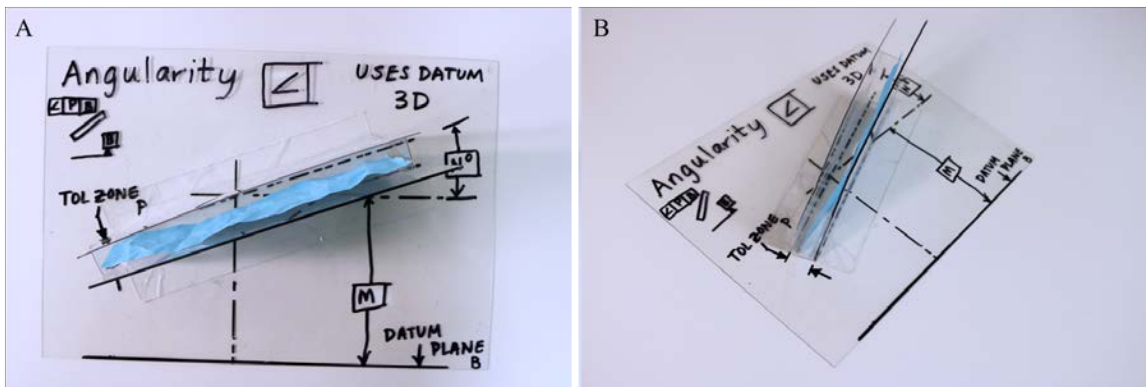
GD&T Spatial Learning Tool for Angularity
